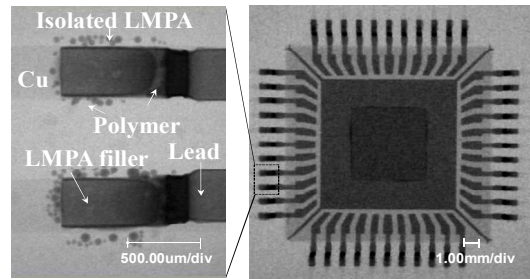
X-ray photographs of QFP assembly with solderable ICA.
